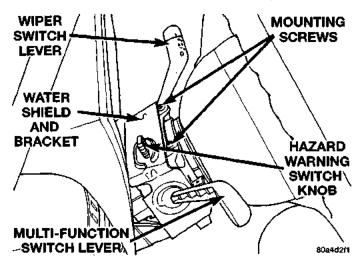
Water Shield Upper Screws Remove/Install water shield and bracket to the steering column (Fig. 15).
